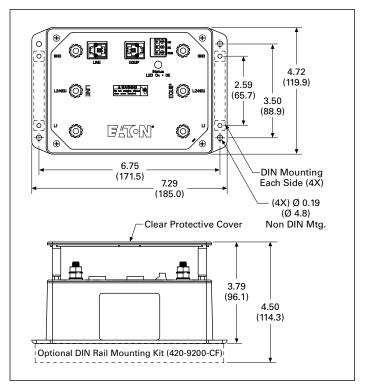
AGCFxxx60xxx Dimensions in Inches (mm)
